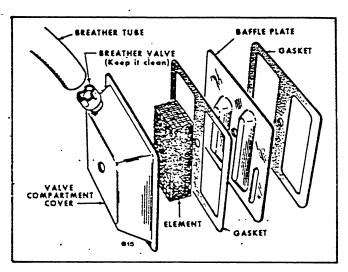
BREATHER VALVE AND FILTER MAINTENANCE
